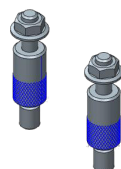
Bolt 3282/45 (1 set = 2 pieces)
